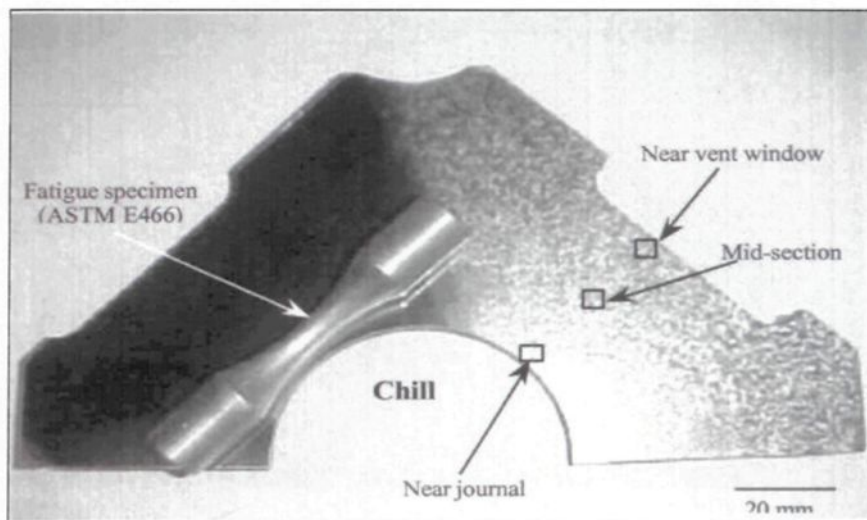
Location of fatigue sample taken from the bulkhead of a "V" engine block.⁶⁰
